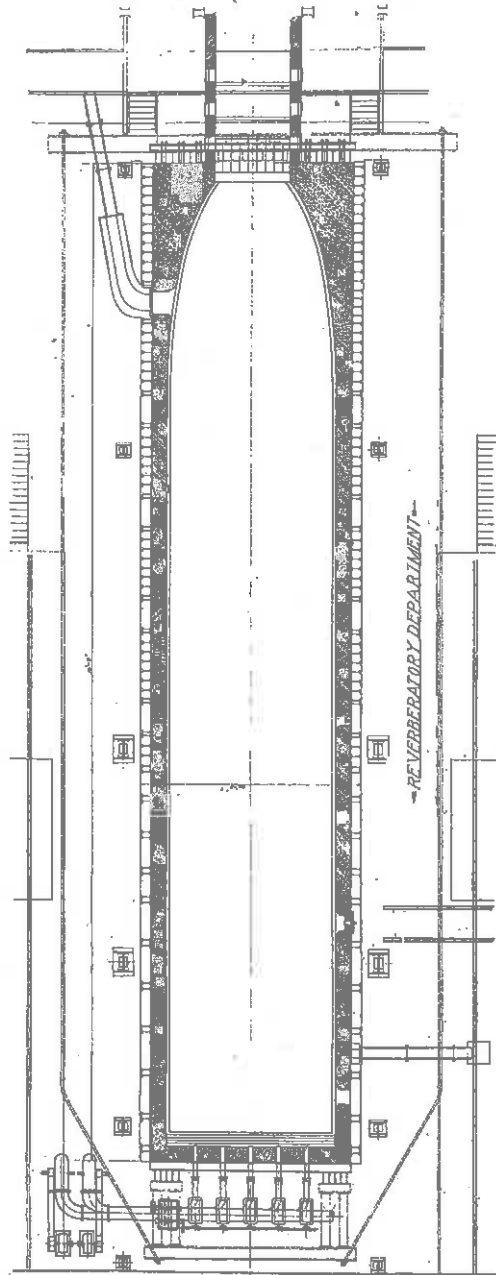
Sectional plan of No. 1 reverberatory furnace.
